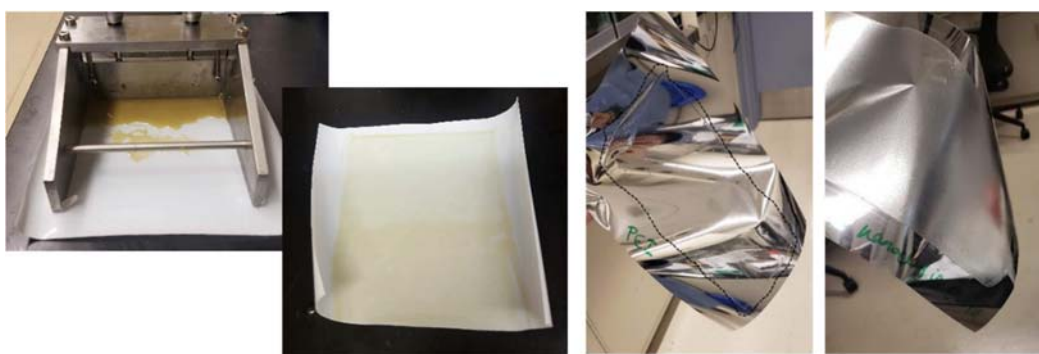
Left: Tape casting method; Right: Sample coatings.
